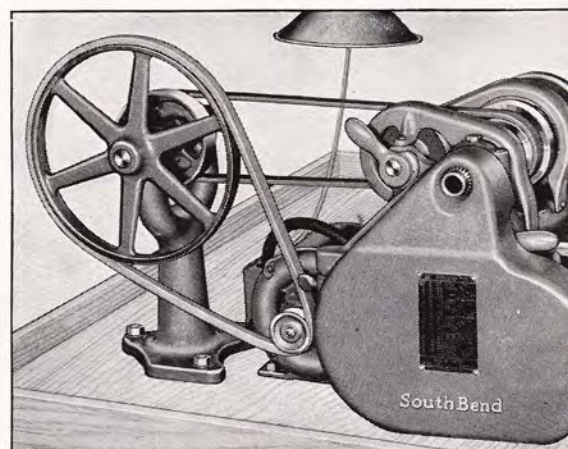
End View of "Workshop" Lathe with Plain Horizontal Motor Drive Countershaft.
